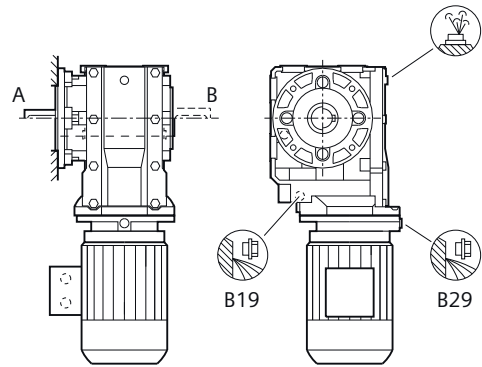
Mounting positions for bevel gearbox B foot-mounted design, sizes 39 - 49
